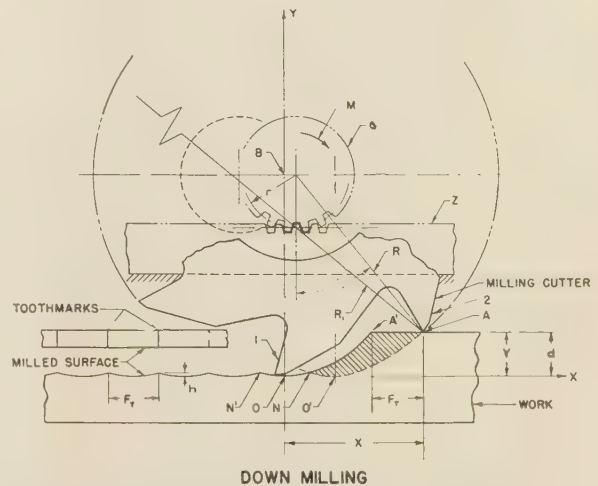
PATH GENERATED BY PLAIN-MILLING-CUTTER TOOTH IN DOWN MILLING
